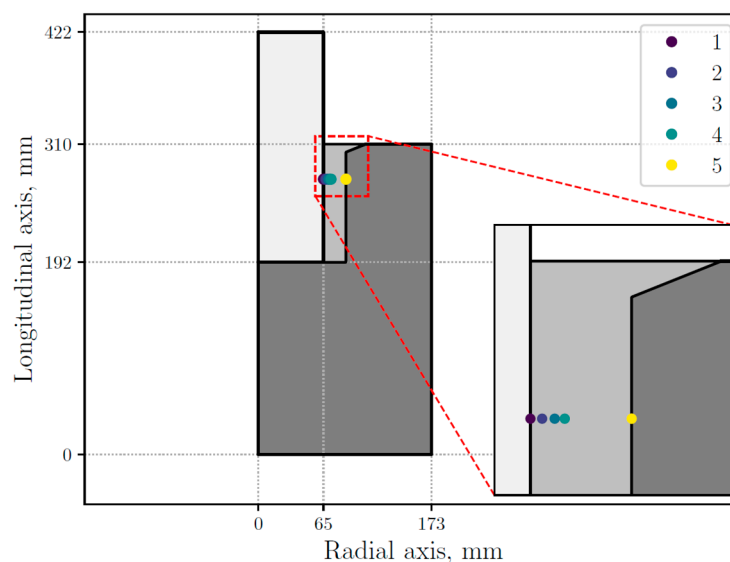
STC (stub-to-carbon) assembly sectional view with five selected points inside the thimble.
